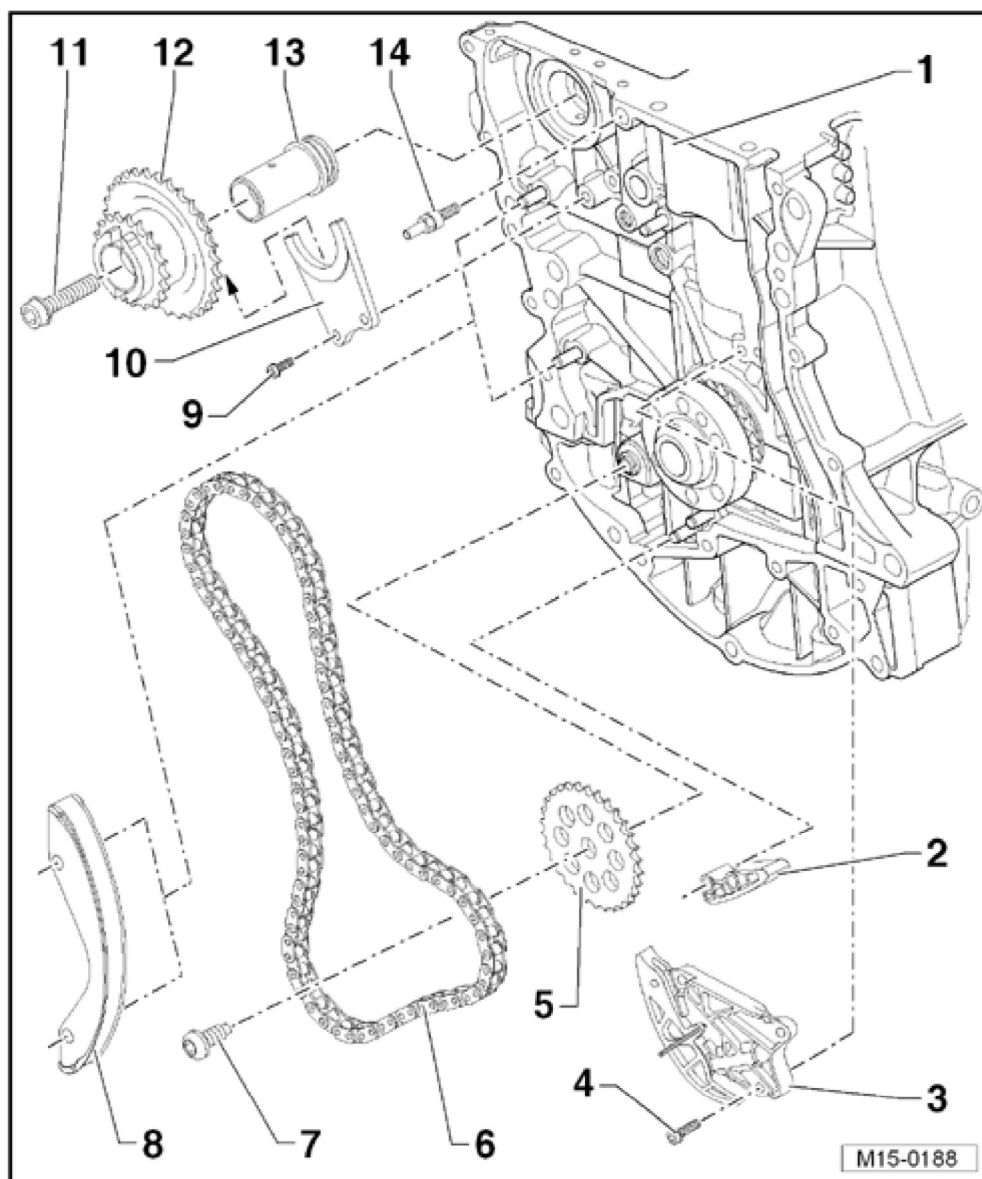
Identifying Timing Chain & Oil Pump Assembly Overview
